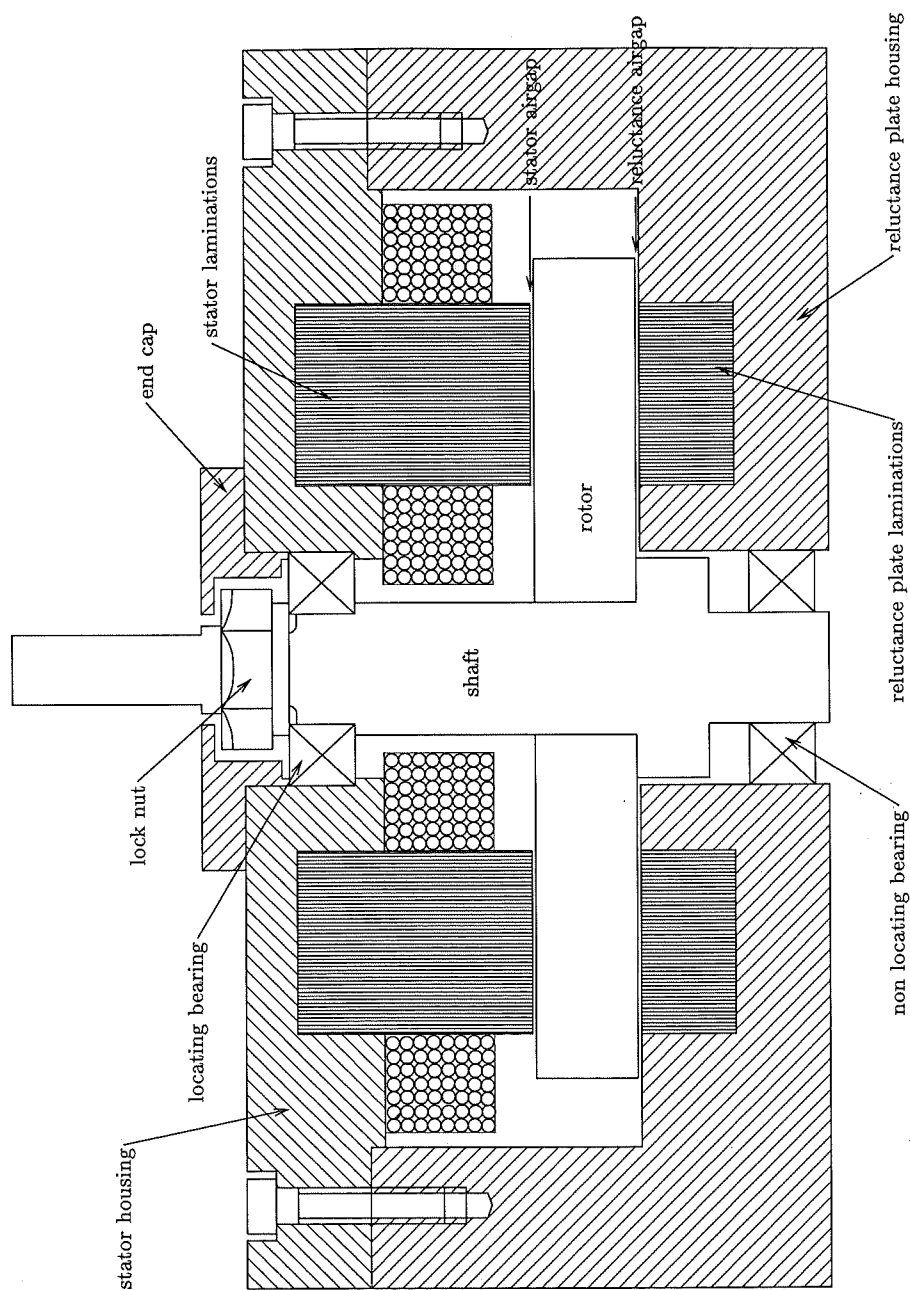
Cross-section of the triangular motor showing structural detail.
